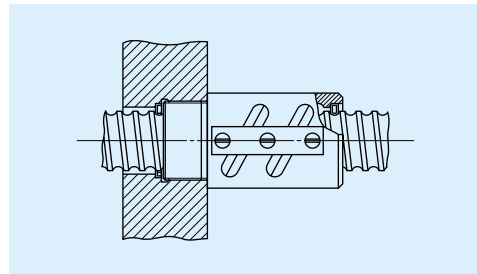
Installation of brush-seal to a ball nut with thread screw
